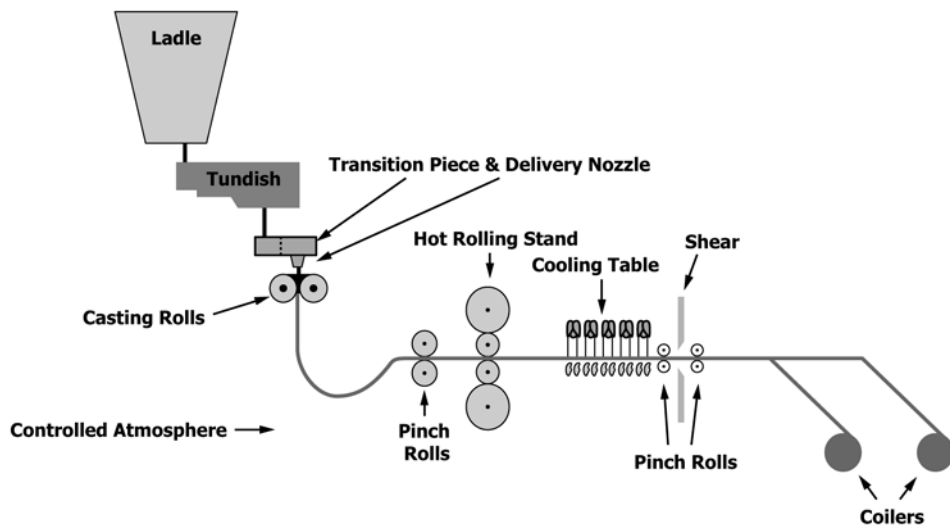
Layout of a Twin-Roll Casting Machine Showing the In-Line Hot Rolling Mill
